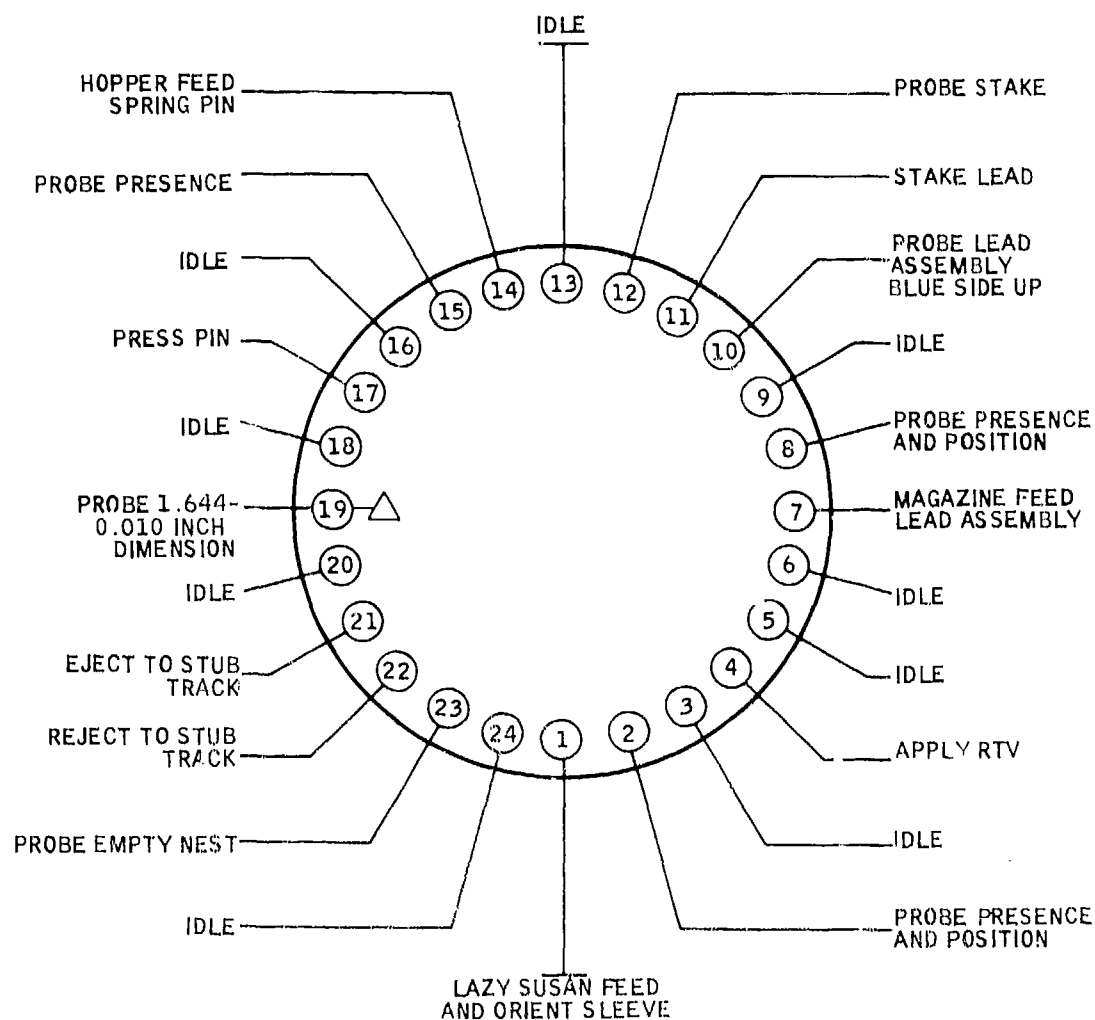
Dial schematic, machine F3 - rear fitting assembly operation 1
